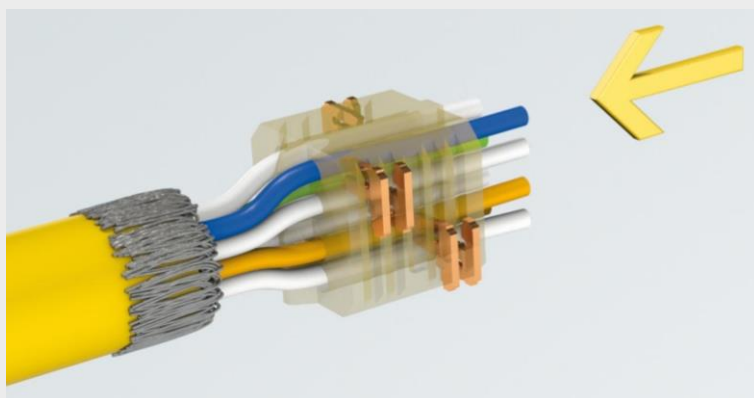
Assembly step 1 – Thread single wires into the preLink® connection block
